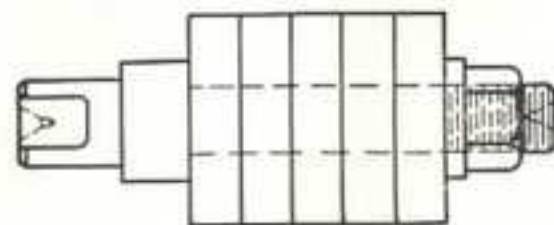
Nut Mandrel for Finishing Gear Blanks
